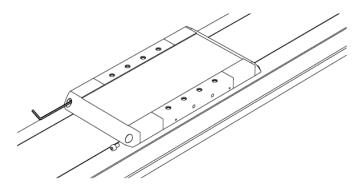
Mounting of cover strip in the cover strip clamp
